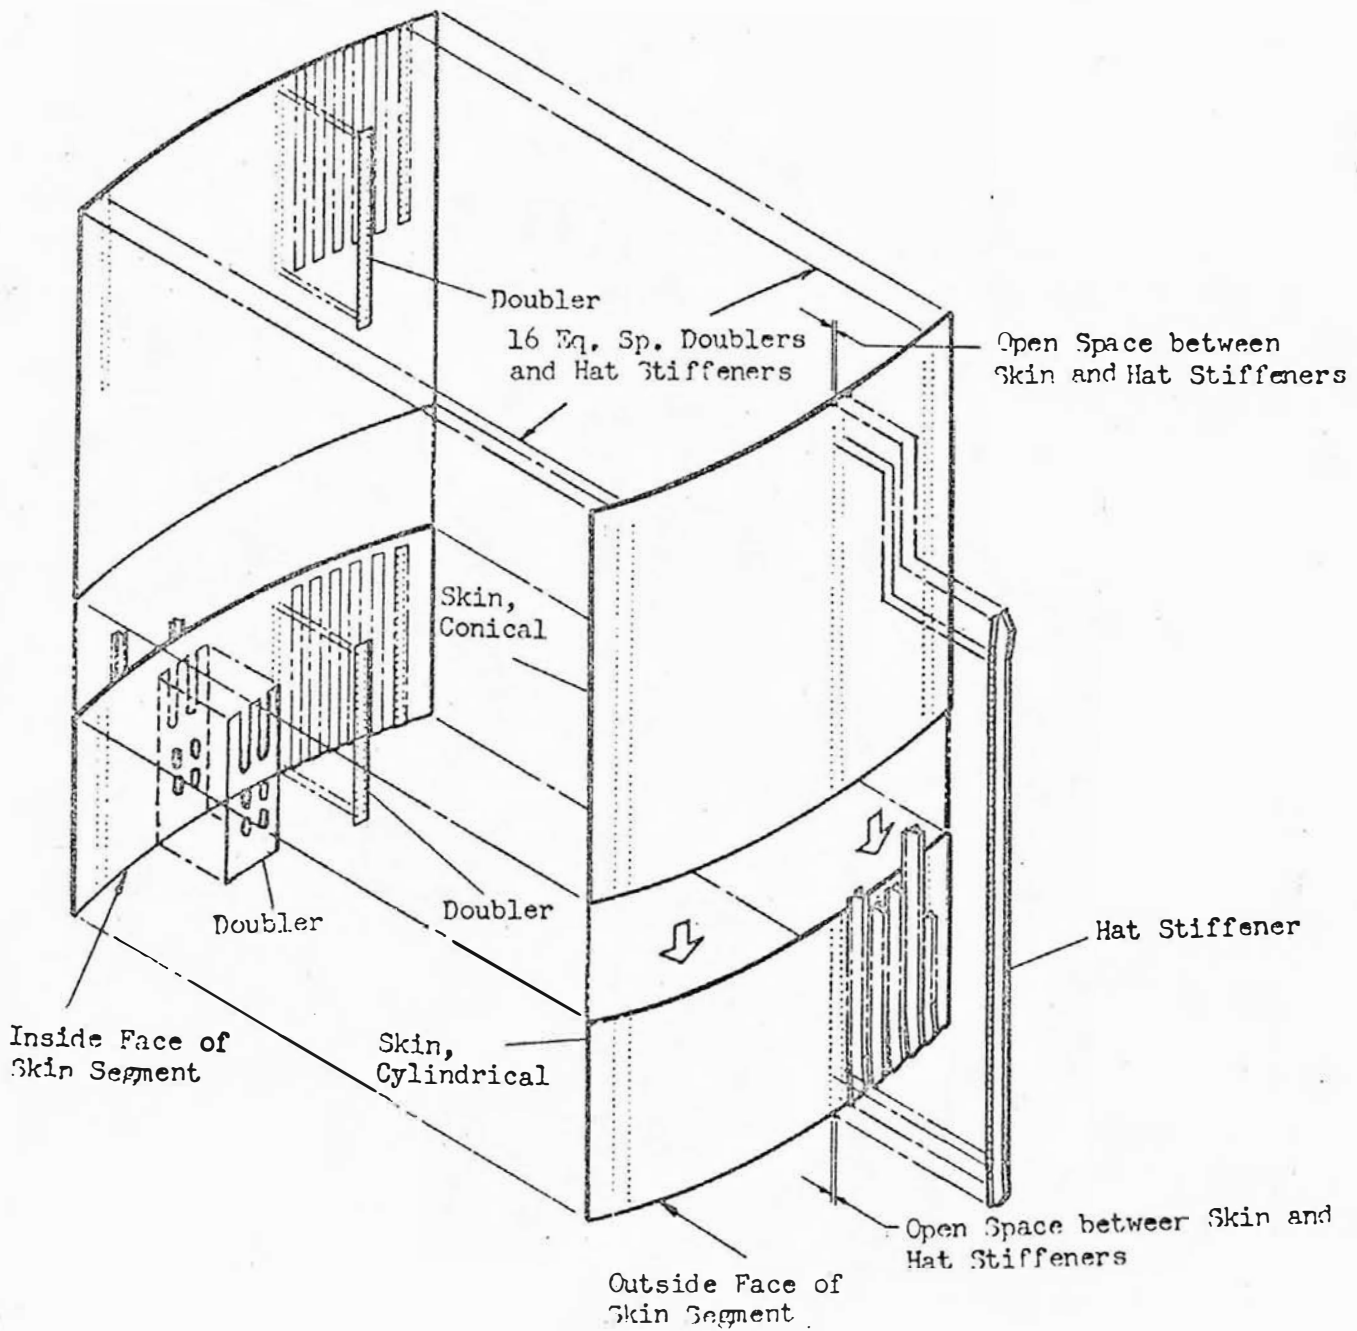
Skin Segment Assembly 60B14400-1-900
